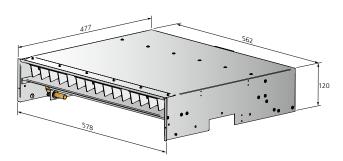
Dimensional drawing excl. grillew & leakage indicator, sleeve connection side 2.
